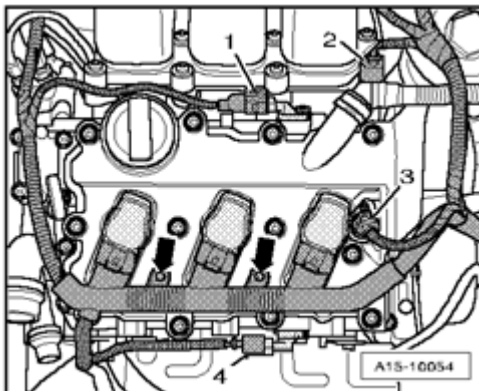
Remove Bolts & Disconnecting Electrical Harness Connectors At Ignition Coils
